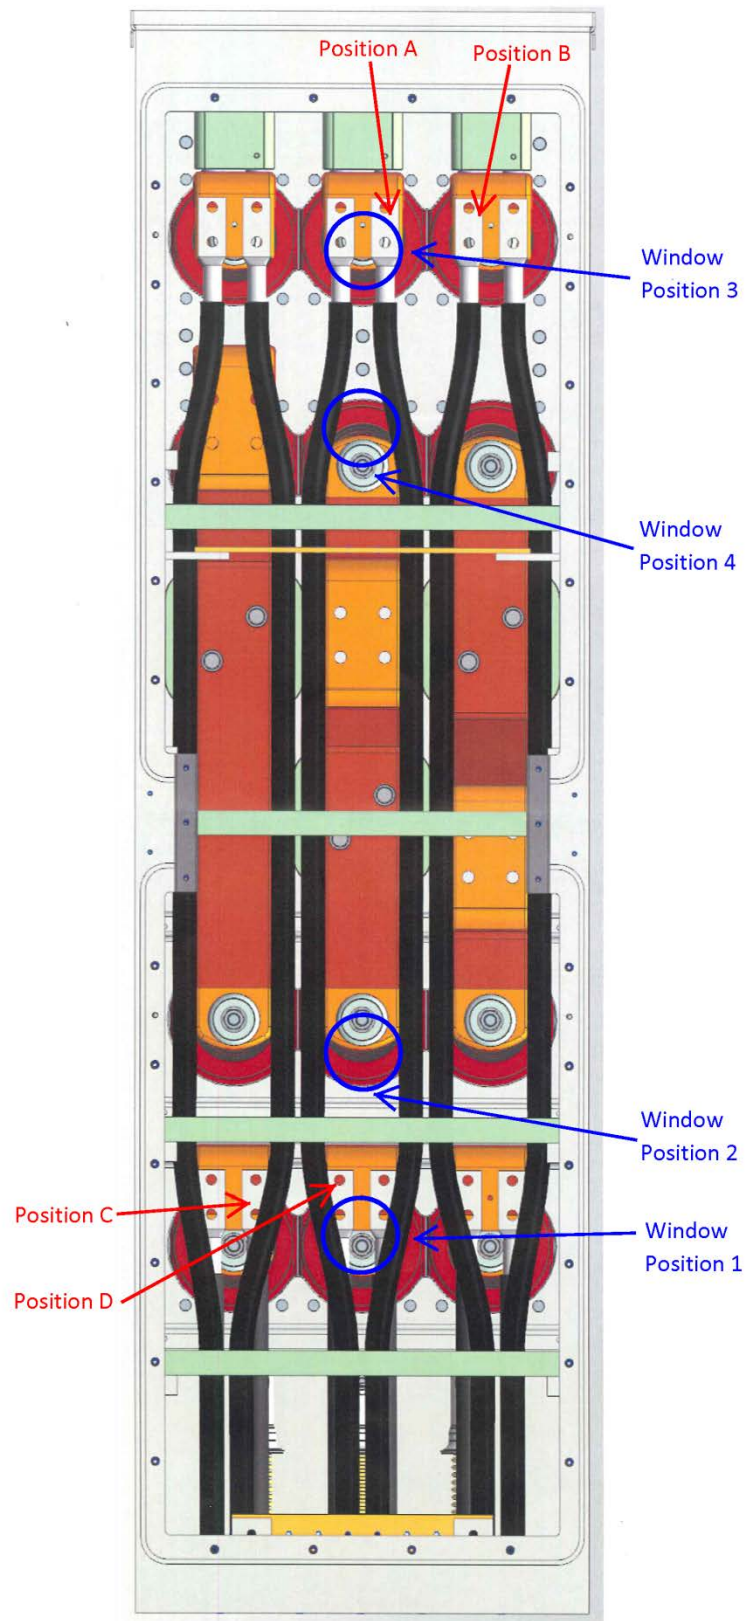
CAD Drawing of Rear of Prototype Cabinet
